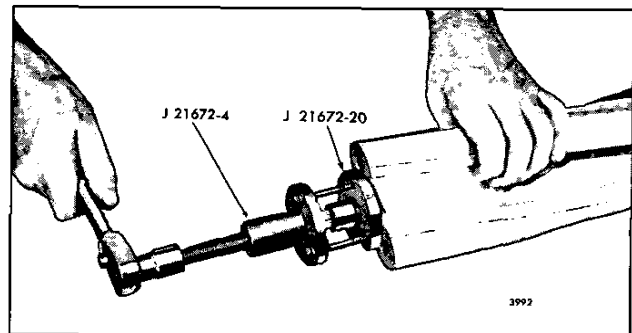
Removing Oil Seal Sleeve and Roller Bearing Inner Race from Rotor Shaft
